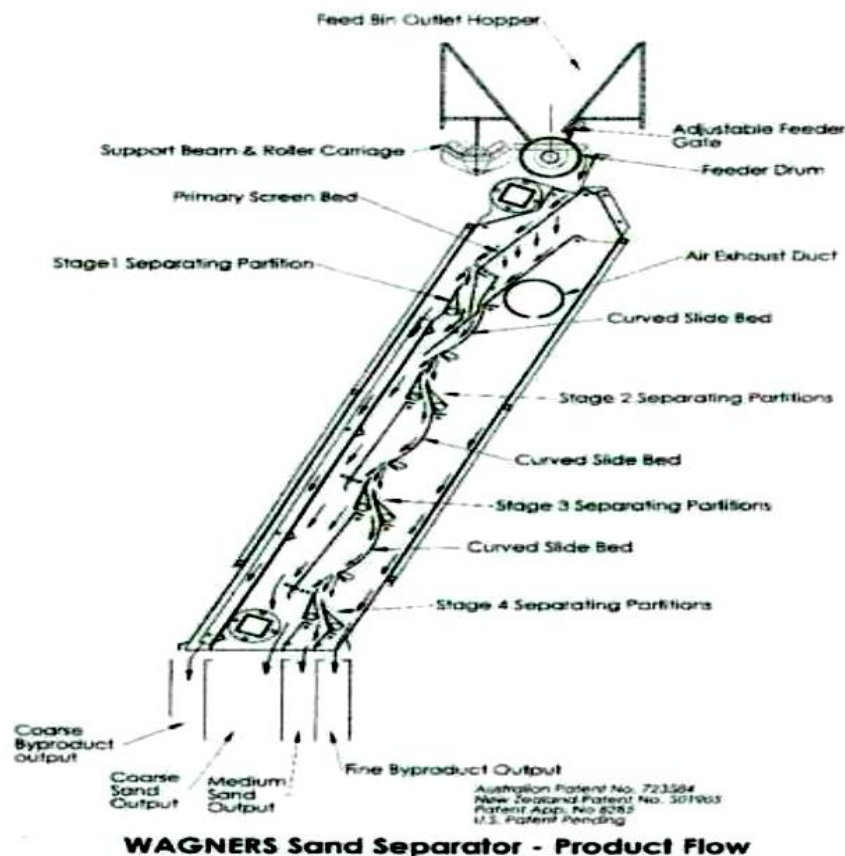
Schematic of the "Great Divide" Sand Separator showing the separation of fines in Manufactured Sand.
